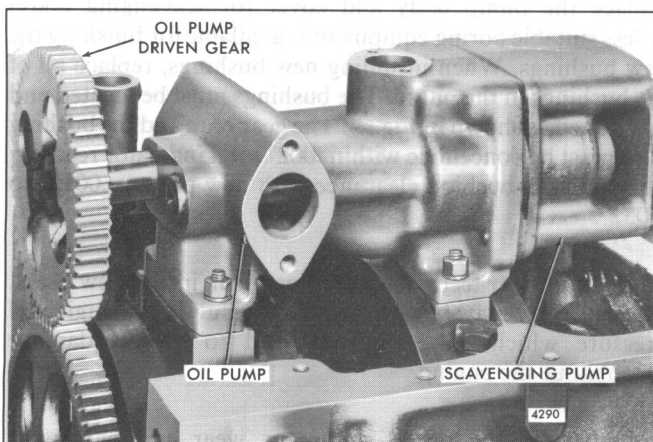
Oil Pump Mounting (6V-92 and 8V-92 Engine)
